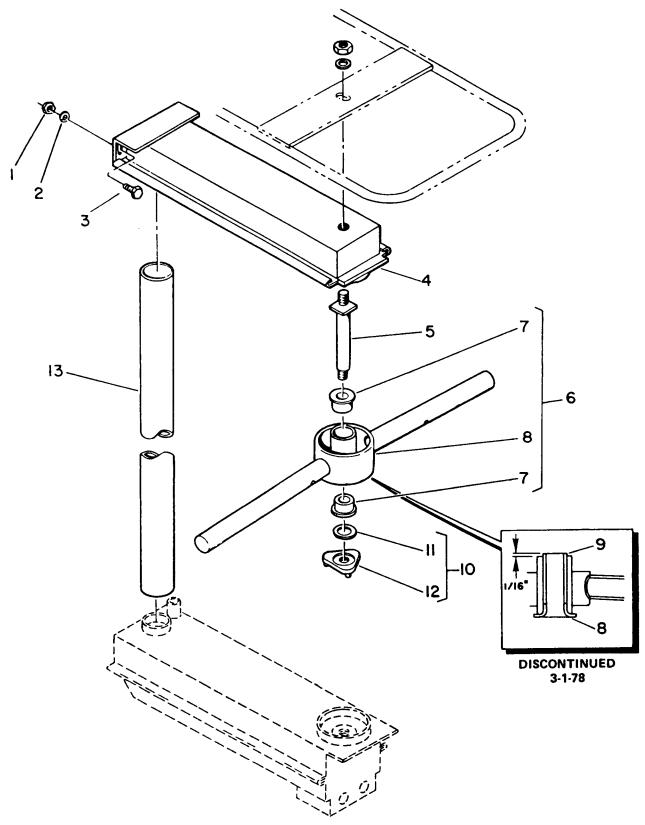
UPPER MANIFOLD & WASH ARM
